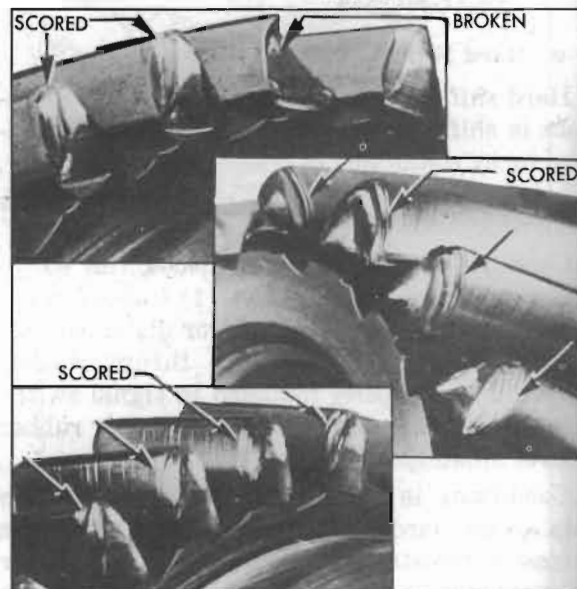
Gear Teeth Damaged by Improper Gear Shifting
